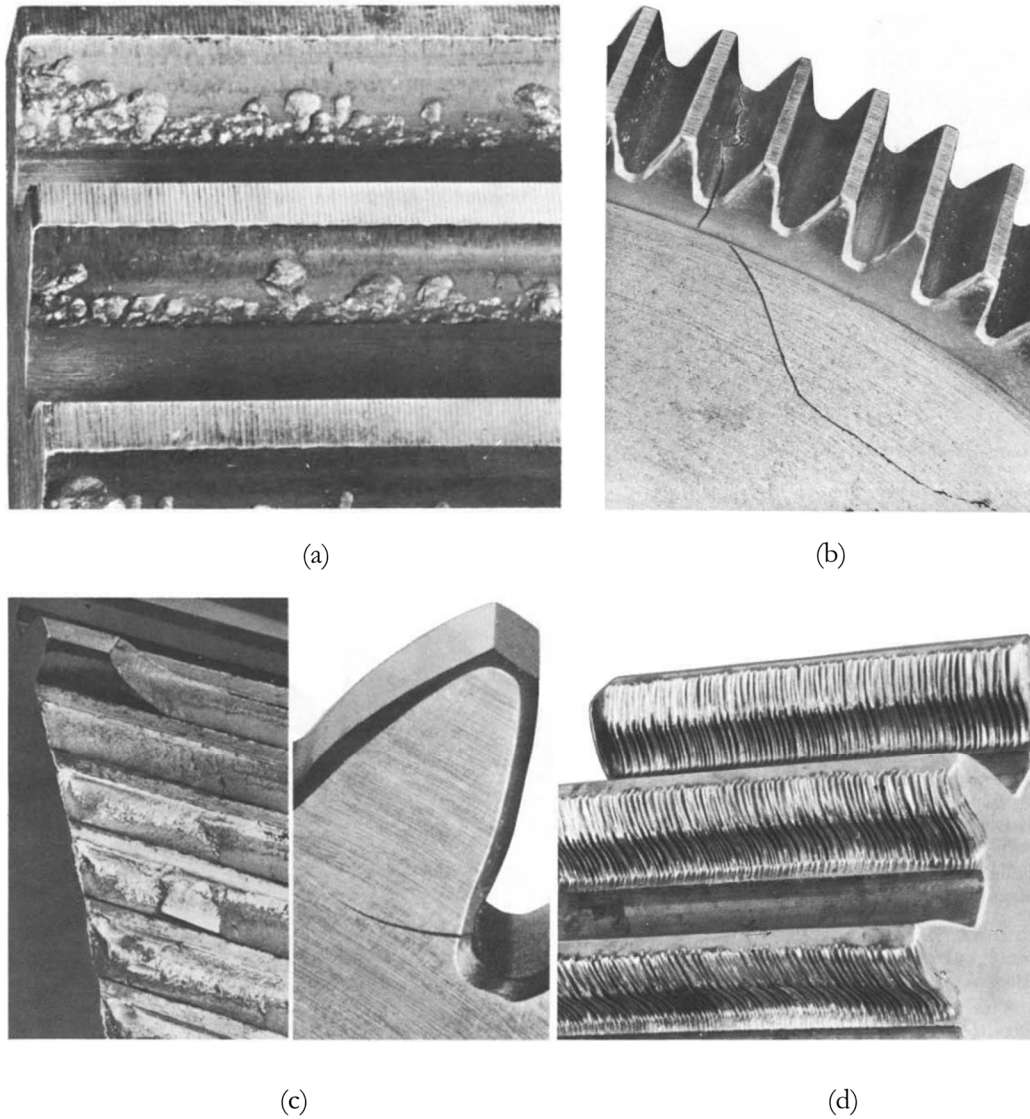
Some typical failure classes: (a) destructive pitting, (b) rim and web failure, (c) beam bending fatigue, and (d) abrasive wear [12].
